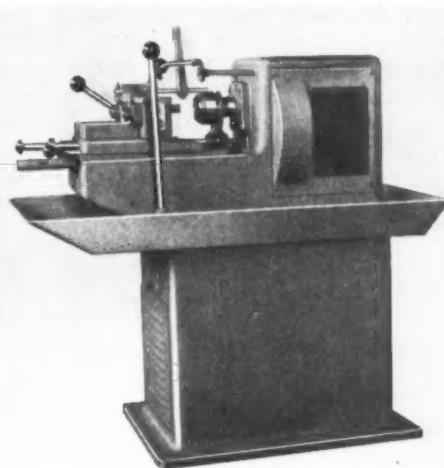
Geometric Machine for Cutting Threads up to 1 1/2 Inches Diameter
